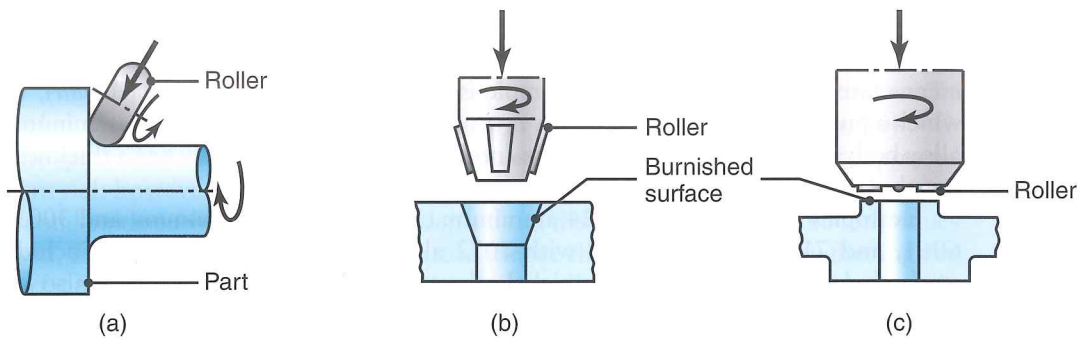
Burnishing tools and roller burnishing of (a) the fillet of a stepped shaft to induce compressive surface residual stresses for improved fatigue life; (b) a conical surface; and (c) a flat surface.
